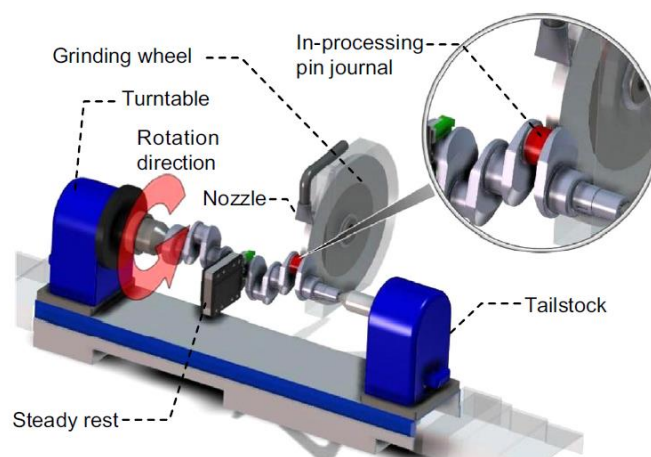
Demonstration of pin chasing grinding in an oscillating grinding machine (Bosetti and Bruschi, 2010)
